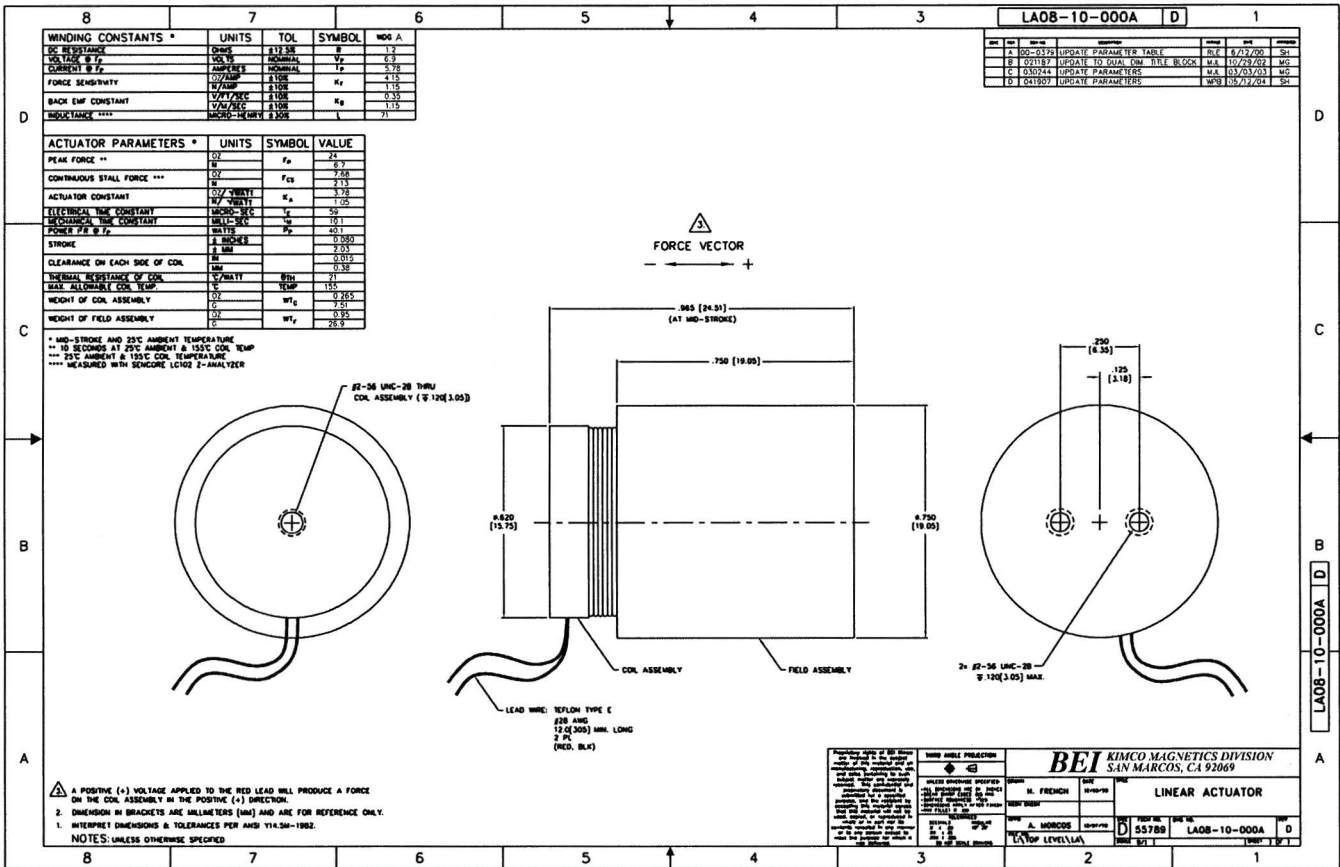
Drawing of the voice coil actuator Bei Kimco LA12
